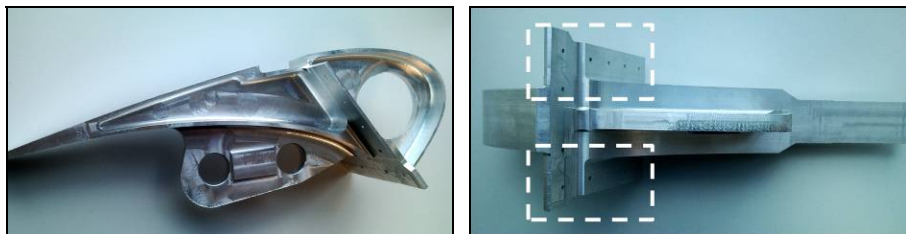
Photographs of the deeply machined aerospace part. Left: side view; Right: top view (note the vertical flanges, indicated by the white rectangles) – Courtesy of Sonaca S.A.
